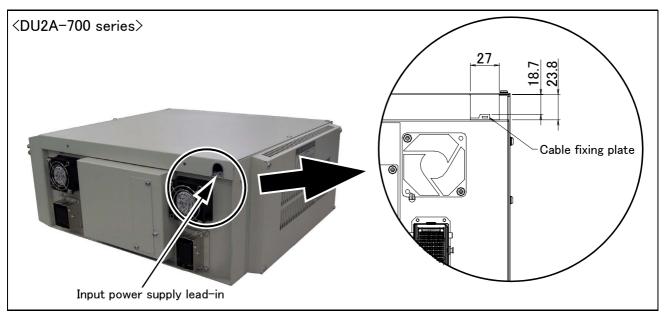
Cable lead-in and dimension of the controller (CDU2A-700 series)
